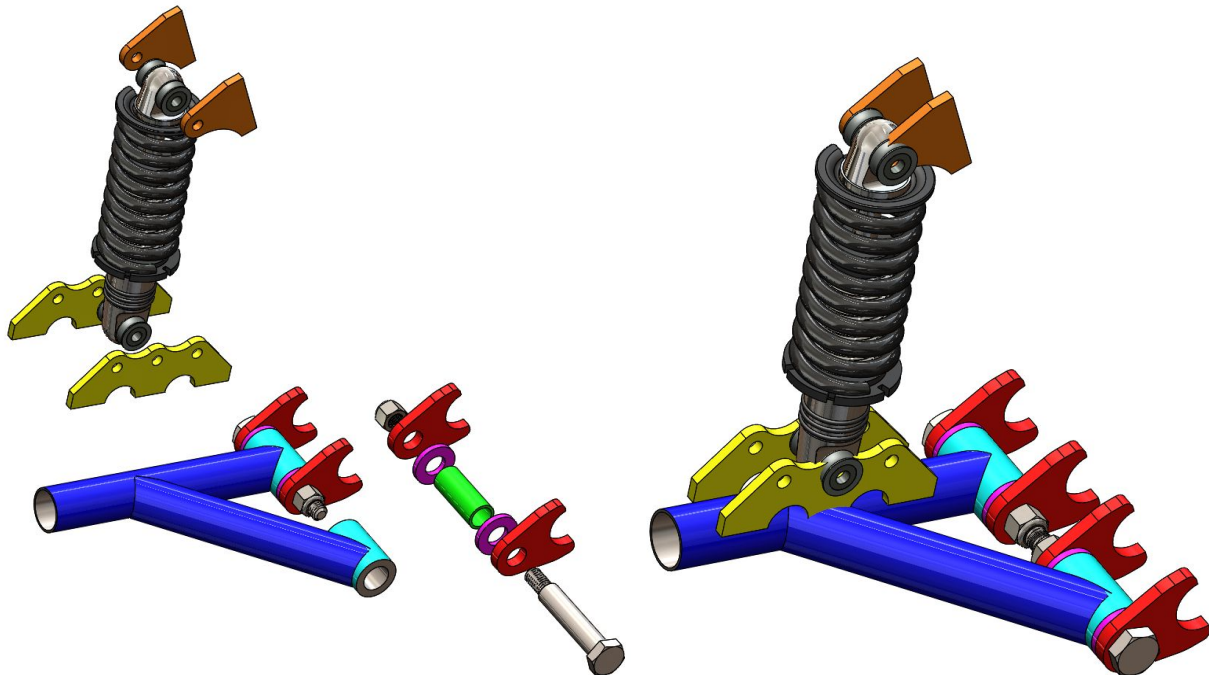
Final design of suspension. The control arm (1" OD steel tubing) is depicted in blue, bushing housing (1" steel rod) in cyan, control arm tabs (3/16" steel plate) in red, lower spring (3/16" steel plate) tabs in yellow, and upper spring tabs (3/16" steel plate) in orange for clarity.
